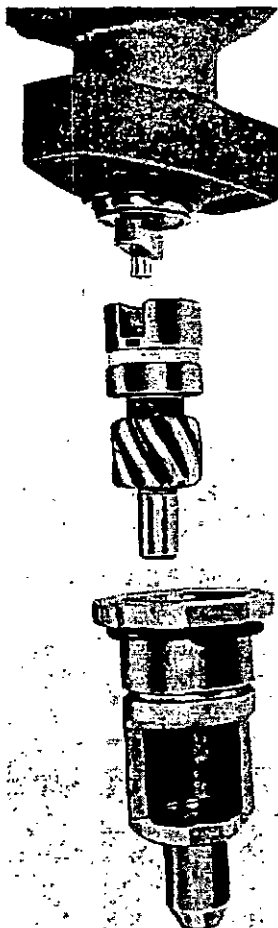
Roosa Model "D" Pump with two-piece drive shaft and eccentric bushing
